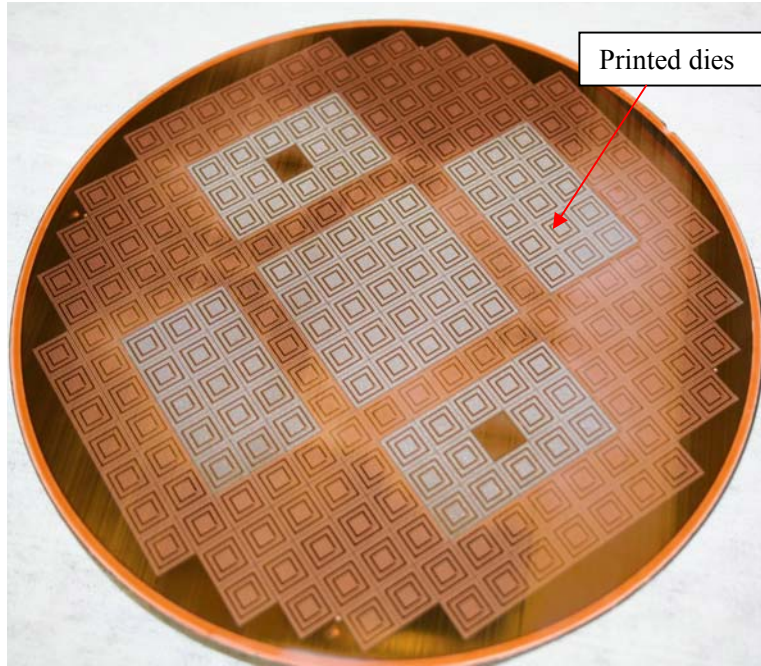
SolderBrace printed wafer for the UV-defined cleaning application
